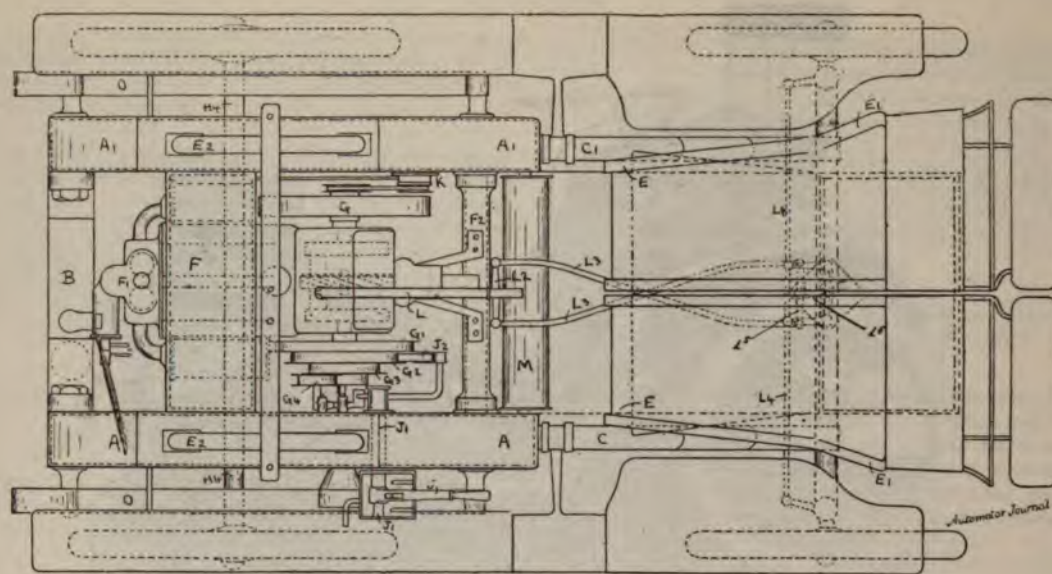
PLAN OF CAPEL CARRIAGE.
